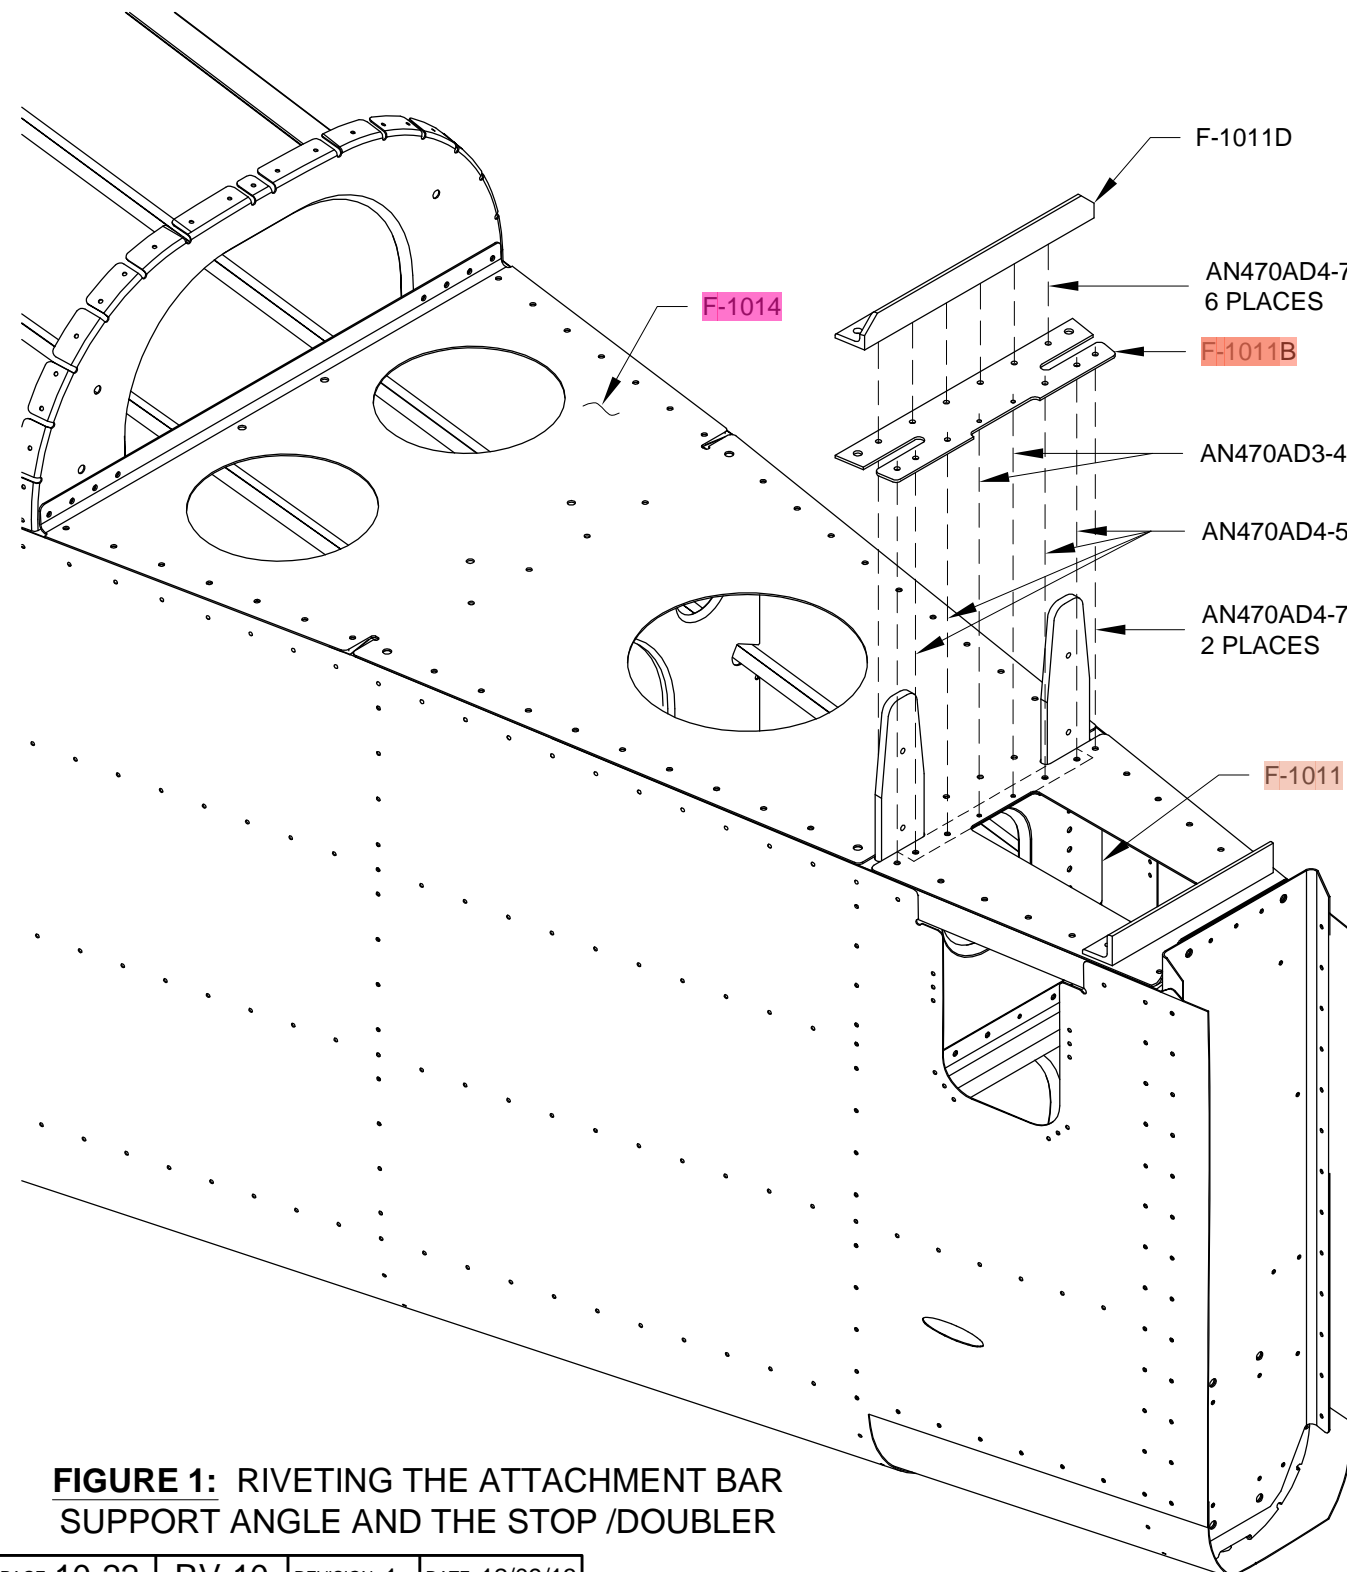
RIVETING THE ATTACHMENT BAR SUPPORT ANGLE AND THE STOP /DOUBLER
